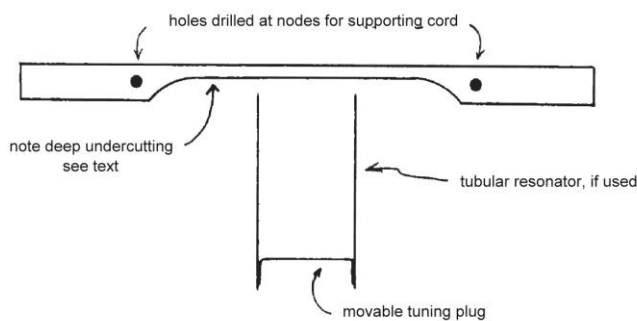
CROSS-SECTION OF A TYPICAL VIBRAHARP OR MARIMBA BAR
